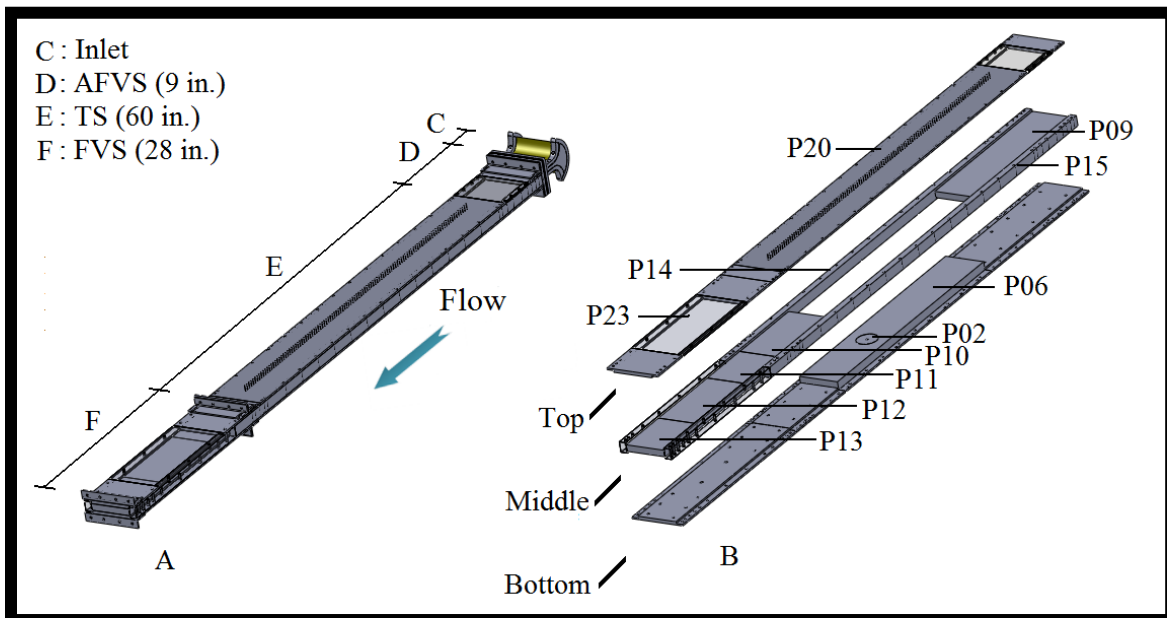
A) Inlet, AFVS, TS, and FVS assembly; B) exploded view
